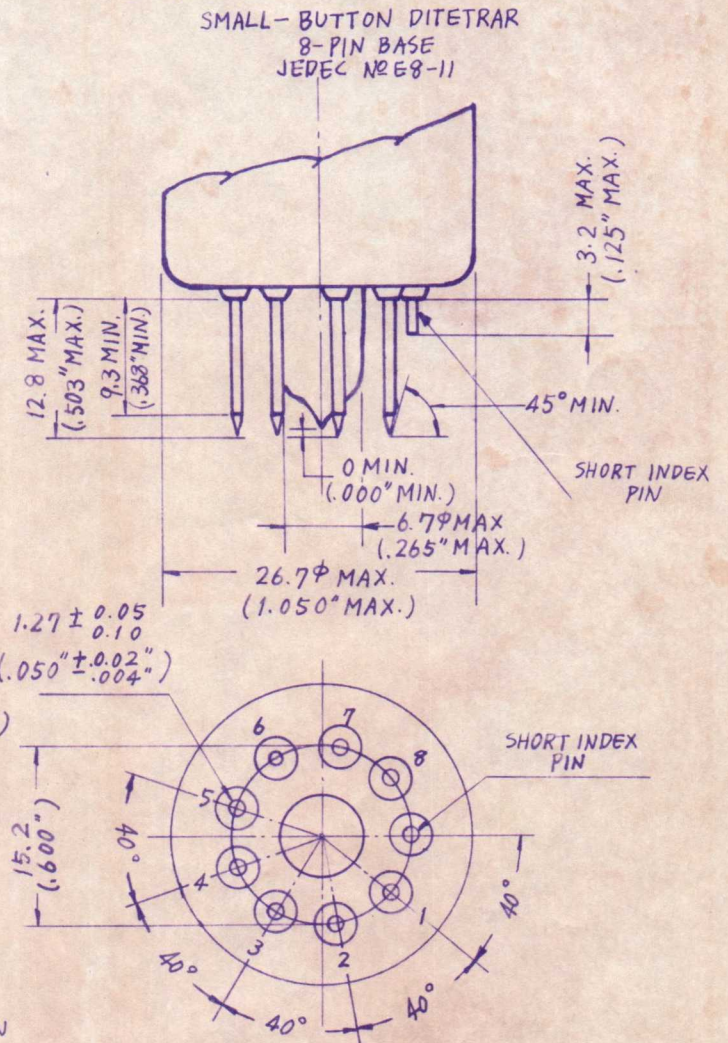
Dimensional Outline, Base Drawing and Socket Connections of Type N157
